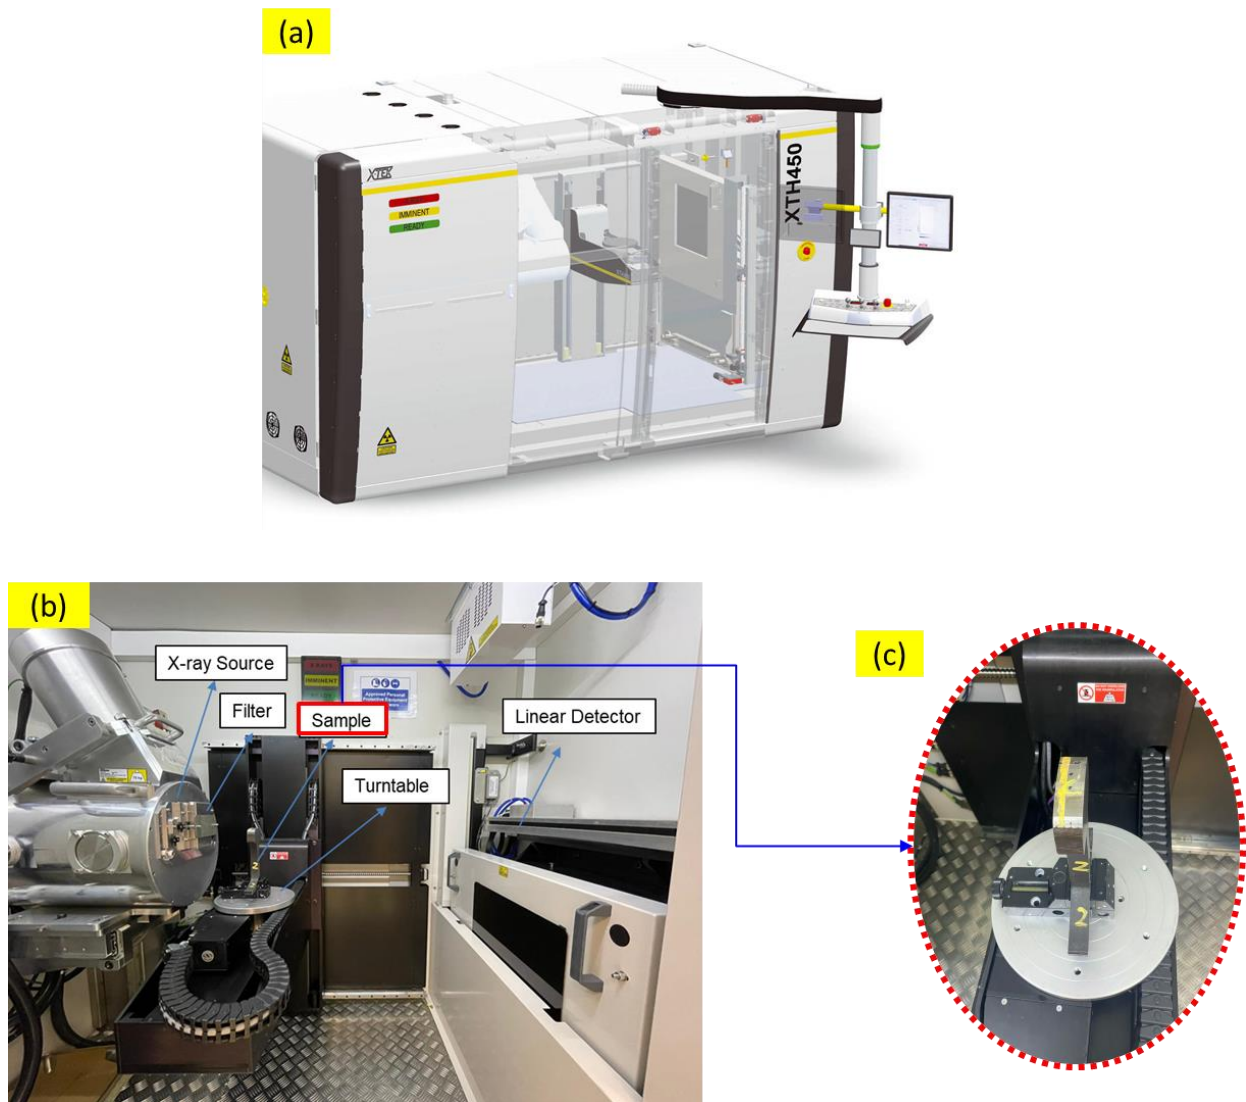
(a) XTH450 X-ray inspection machine, (b) Scan setup, (c) Close-up view of the sample position w.r.t X-ray source
